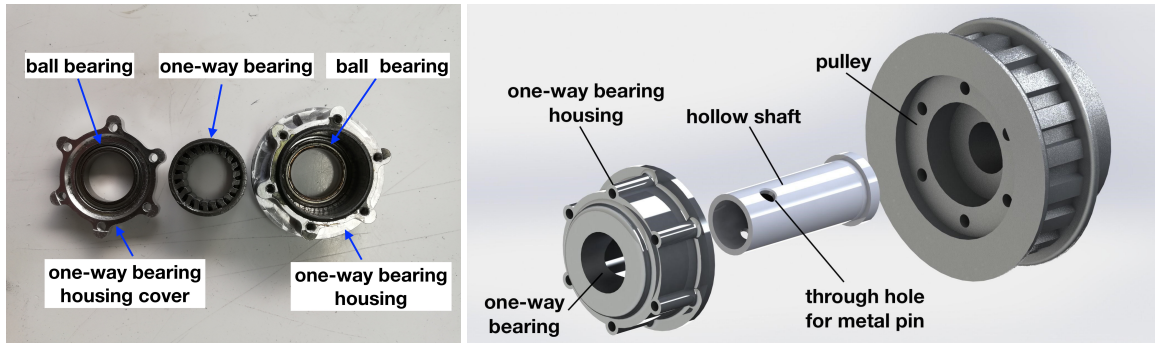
Align RC one-way bearing assembly with exposed spraug bearing and ball bearing supports encased in modified aluminum enclosure. (left) One-Way Bearing Assembly CAD from HEPS. (right)
